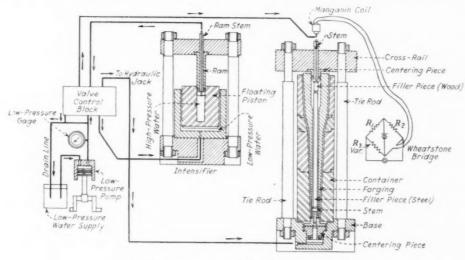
LAYOUT OF COLD-WORKING EQUIPMENT
